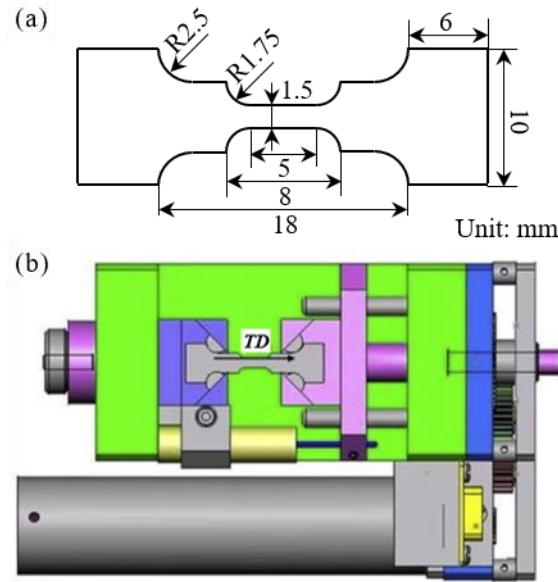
(a) Tension sample dimension with thickness of 1 mm. (b) Sketch of the tension machine.
